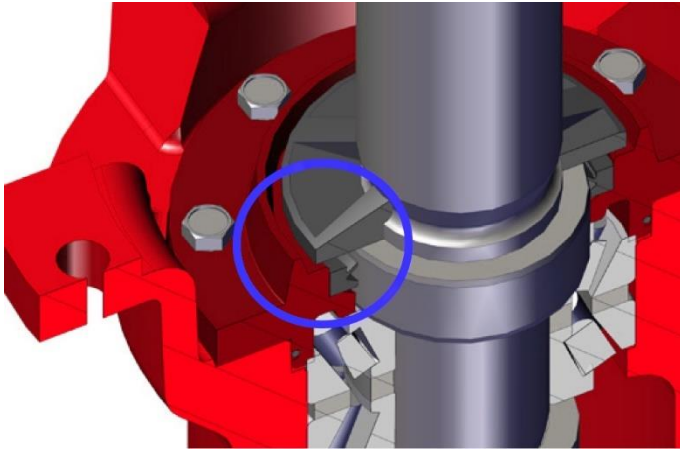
Shaft Flinger, Wet End Bearing and End Cover.
